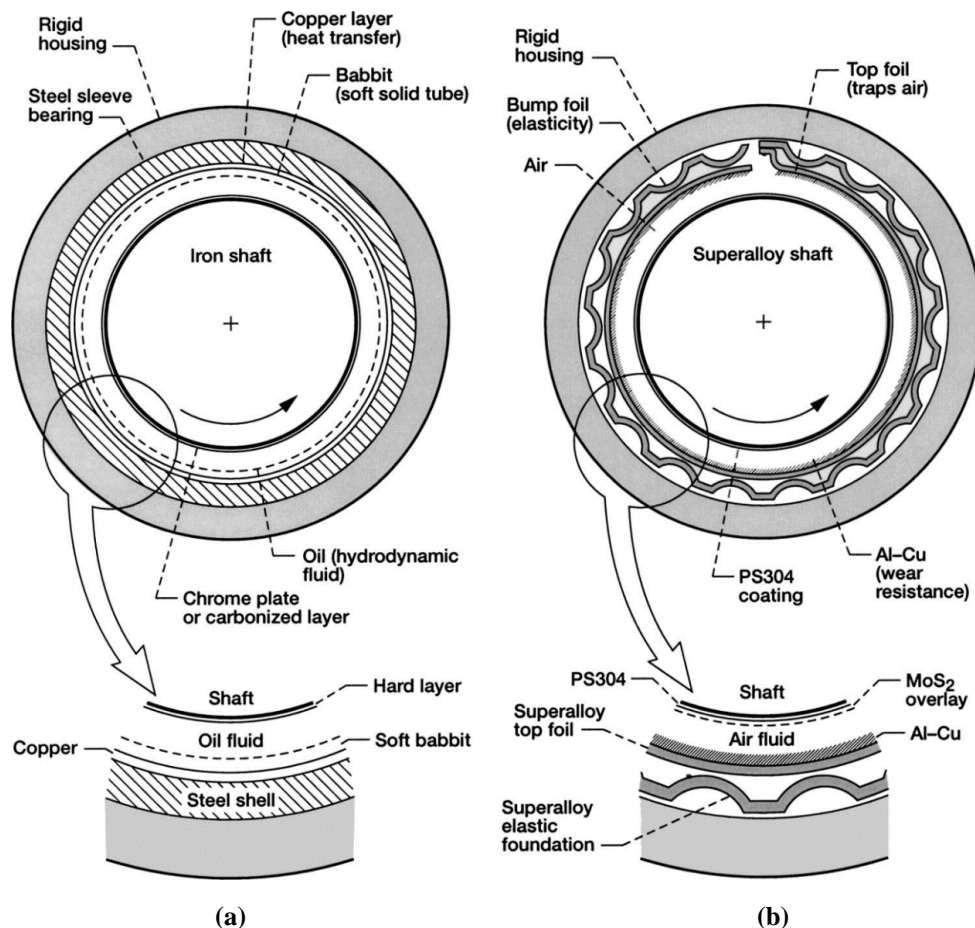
Schematic representation of systems approach to bearing lubrication a) conventional oil lubricated bearing, and b) multilevel solid/gas lubricated foil air bearing [6]
